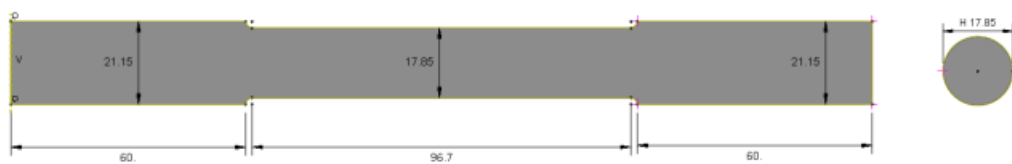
Dimensions of StS material tensile test specimen (DISSIPABLE, 2021).
